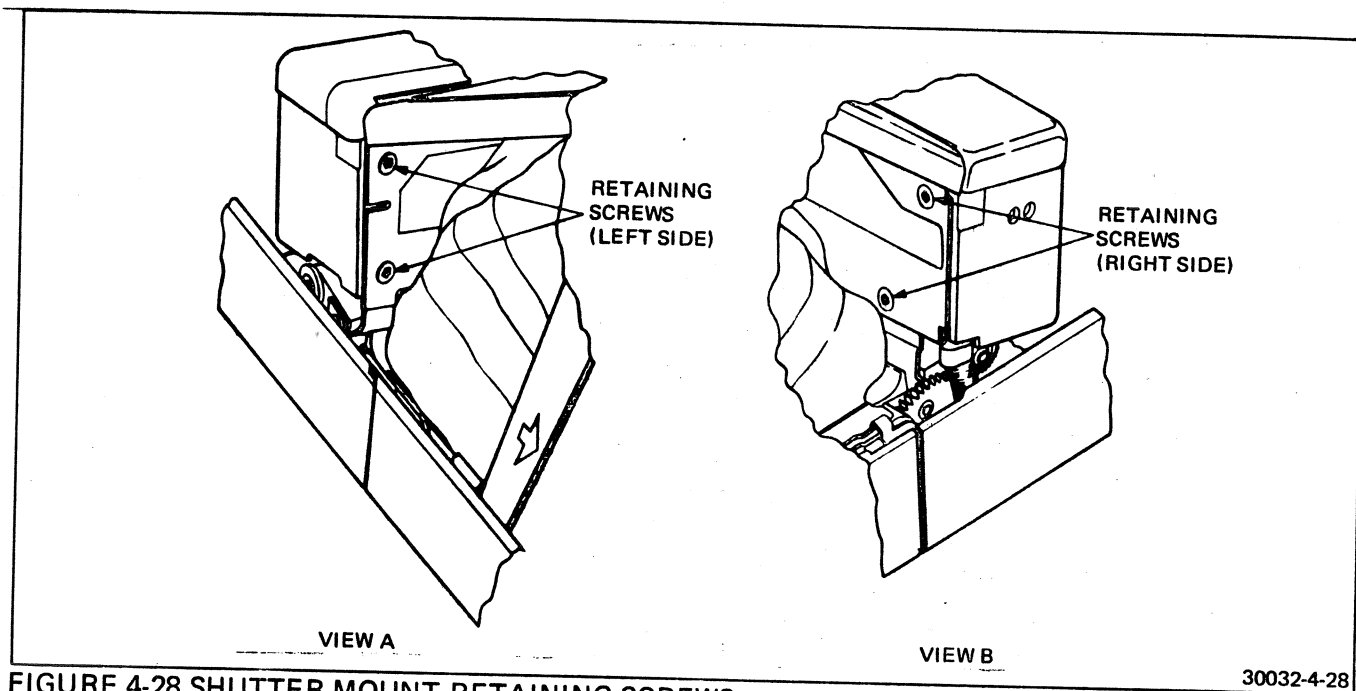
SHUTTER MOUNT RETAINING SCREWS
